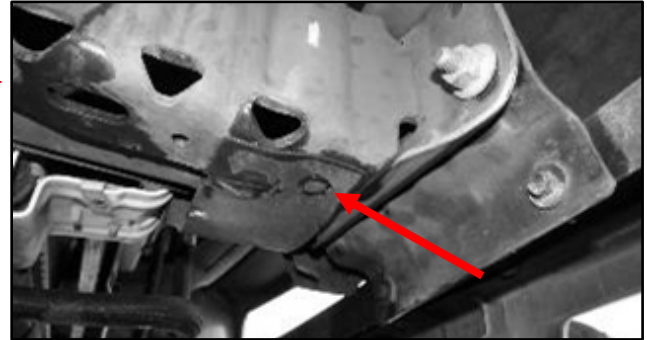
Remove the skid plate by removing the DS bolt that mount the skid plate to the frame
